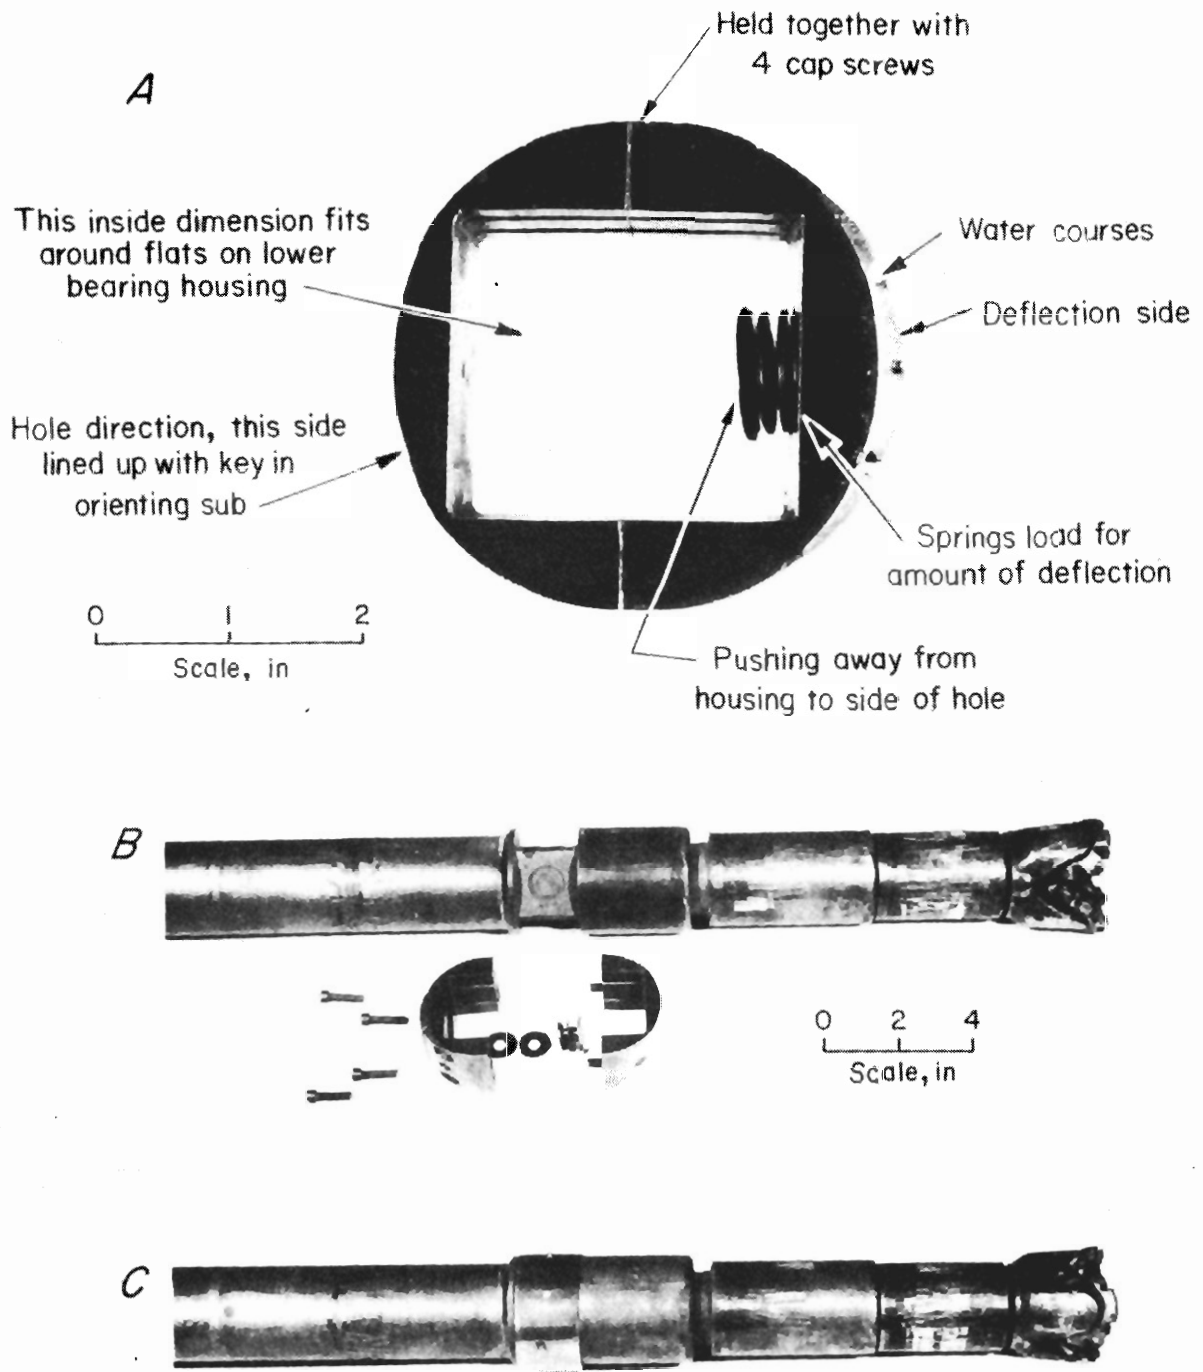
Deflection shoe. *A*, Description; *B*, exploded view; *C*, shoe positioned on lower bearing housing of in-hole motor.
